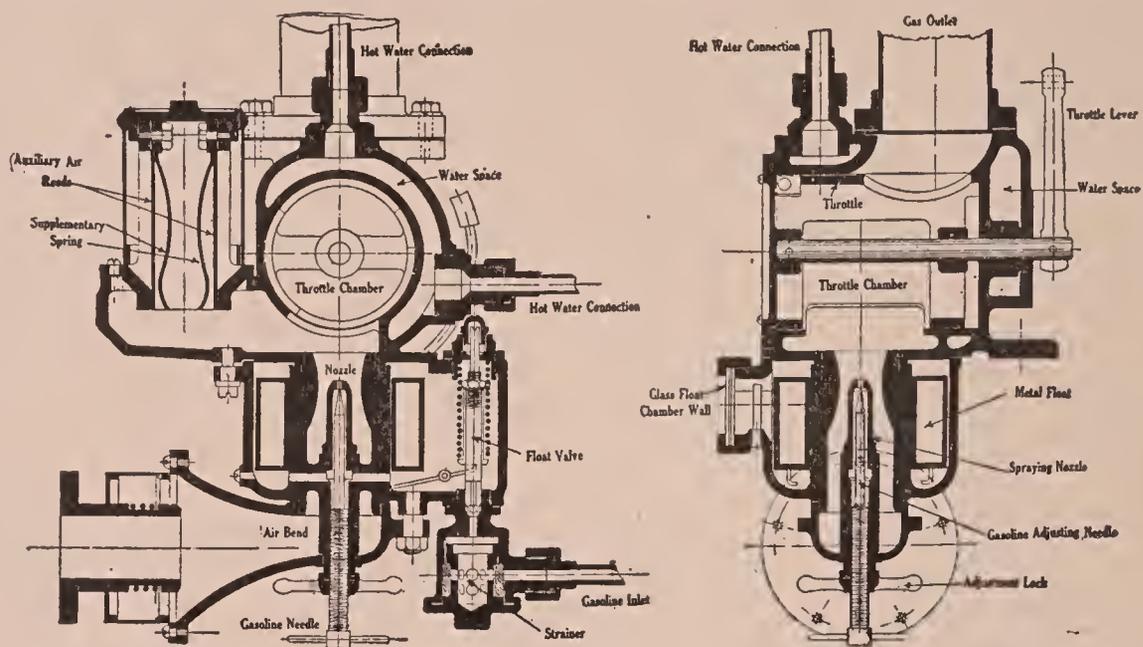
Sectional drawing through the Pierce carburetor with Reed air valve.
